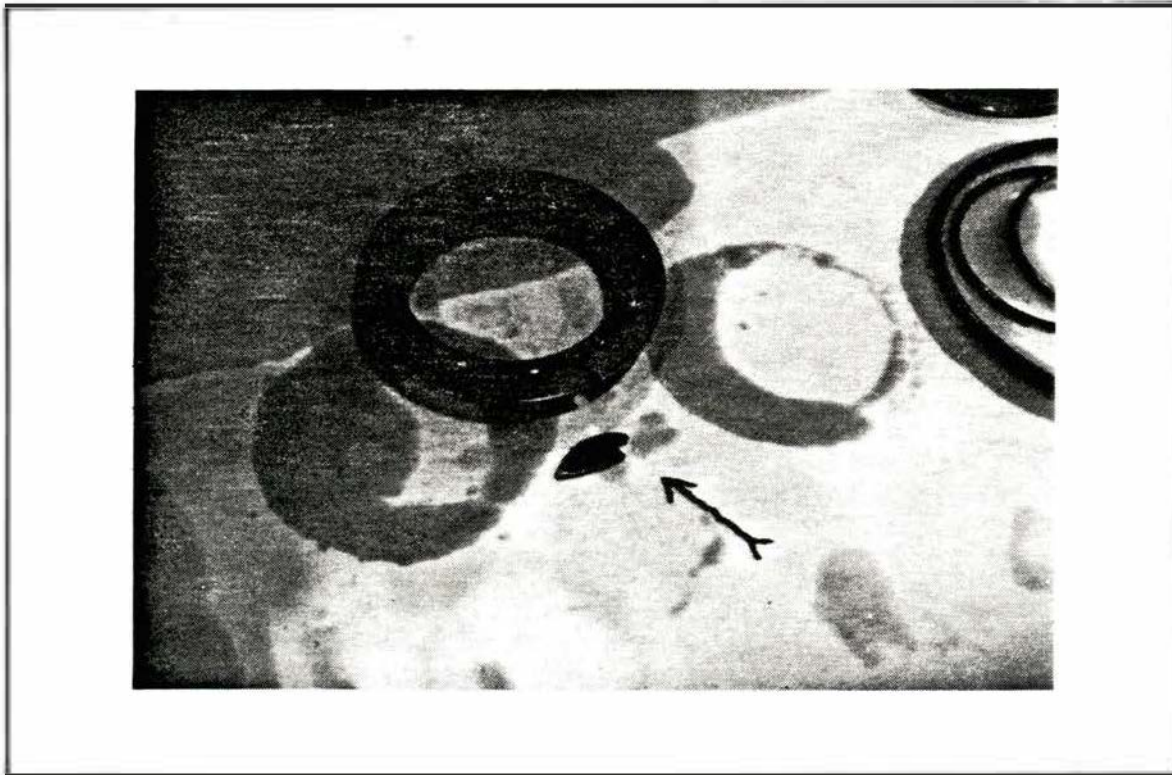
BROKEN PIECE FROM PREVIOUS FAILURE FOUND IN REPAIRED PUMP
